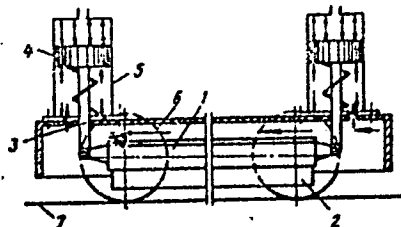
1 - chamber; 2 - gasket; 3 - rod; 4 - piston;
